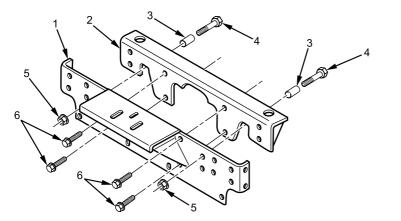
Radiator Support Crossmember and Radiator Support Assembly.
